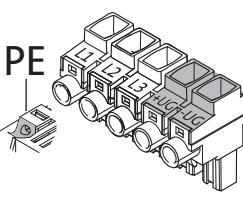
Removal of the contact screws for device sizes 4 ... 6 (on the supply side and on the motor side)
